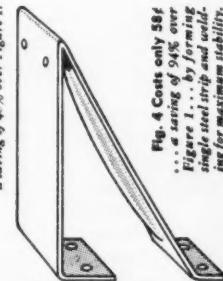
Costs only 58¢... a saving of 94% over Figure 1... by forming single steel strip and welding for maximum stability. Weighs only 9 pounds.
